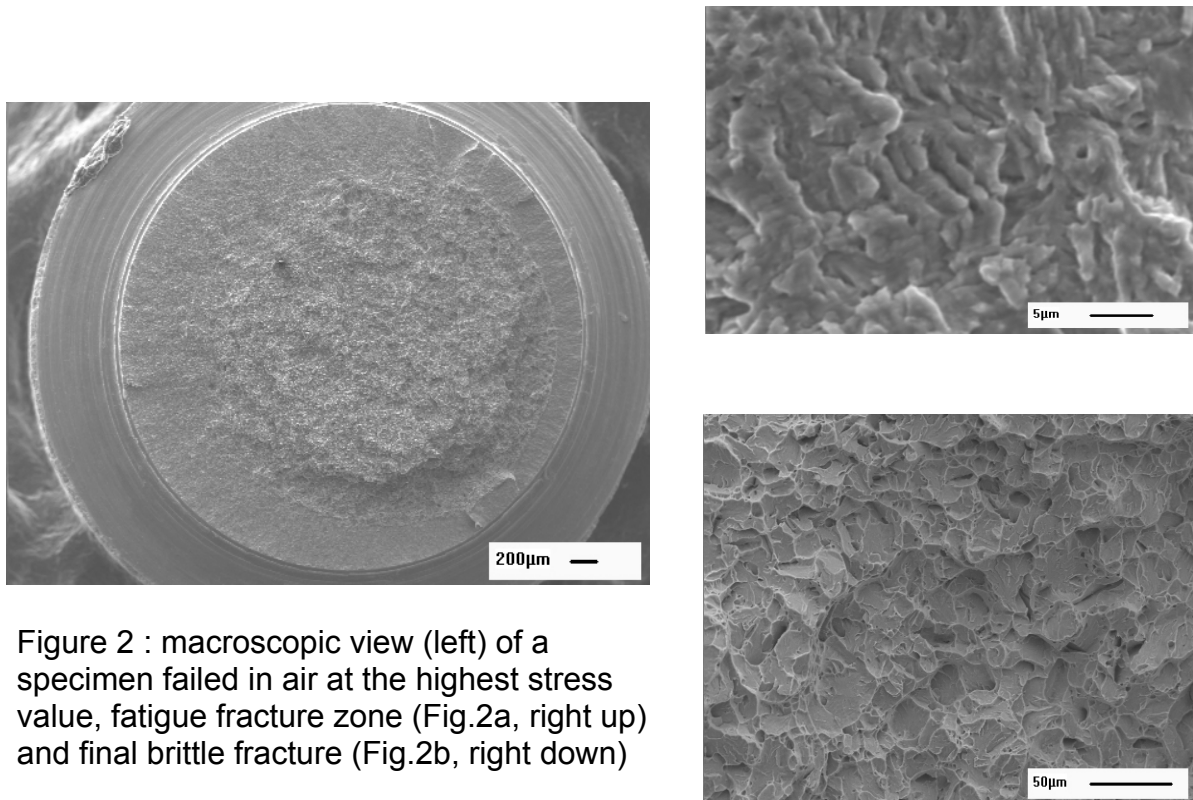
macroscopic view (left) of a specimen failed in air at the highest stress value, fatigue fracture zone (Fig.2a, right up) and final brittle fracture (Fig.2b, right down)
